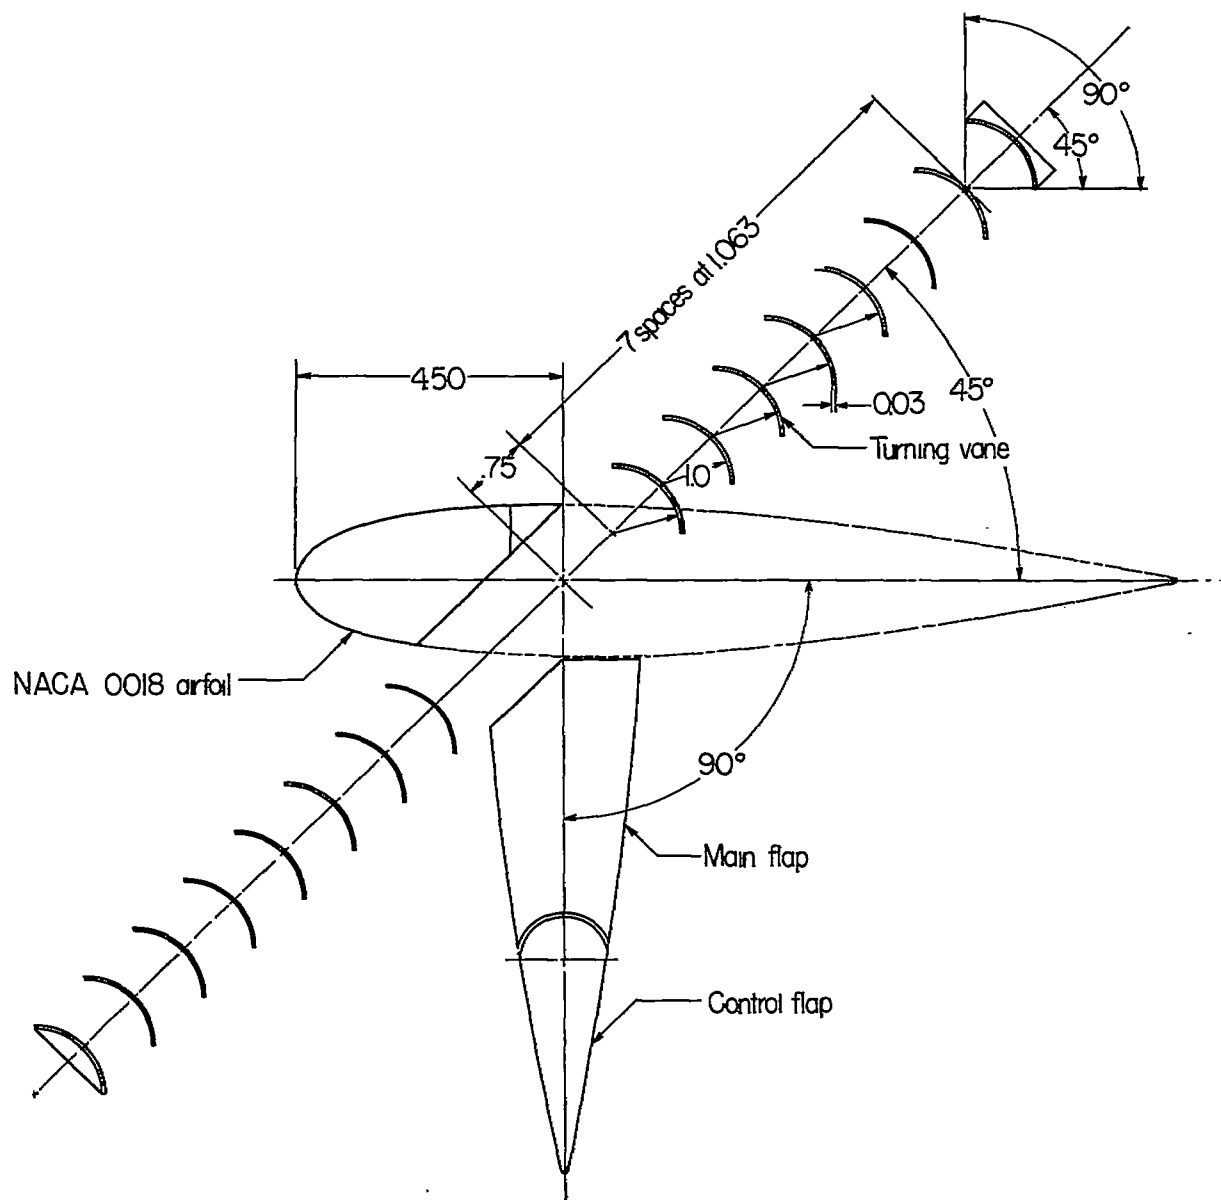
Cross-sectional details of wing showing both the upper and lower sets of vanes. All dimensions are in inches.
